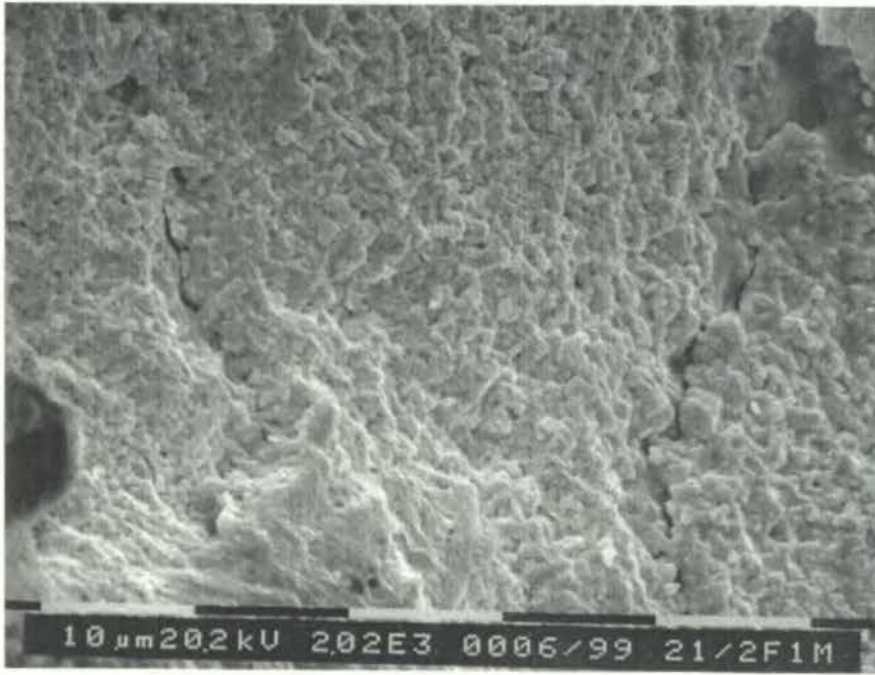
94 Magnified view of Figure 7.92 showing cracks in the substrate of failed KC994M tool
